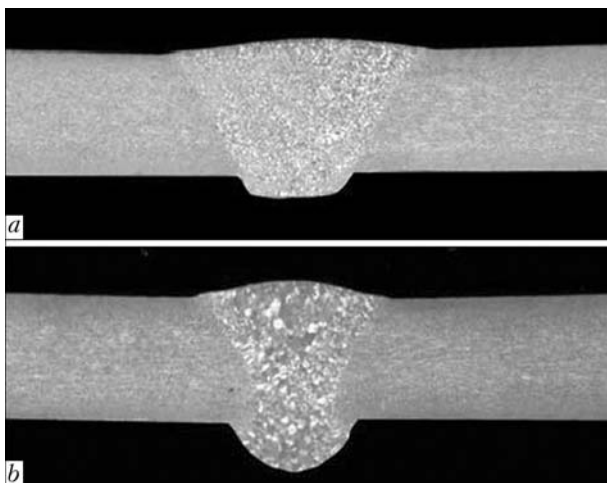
Macrosection of welded joint of 6 mm alloy 1420 (Al–Li–Mg) produced by downhand PAW on a backing with forming groove (a) and in keyhole mode of plasma jet through-thickness penetration (b)
